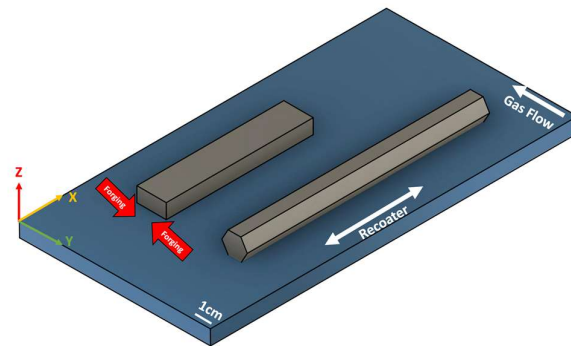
Schematic of test specimen builds relative to the ProX 320 build plate. Hexagonal rods, built to sit flatly on the build plate, were machined into cylindrical specimens (ASTM E8-16, ASTM E466-15). The forging direction used for the bend bar samples is also shown.
